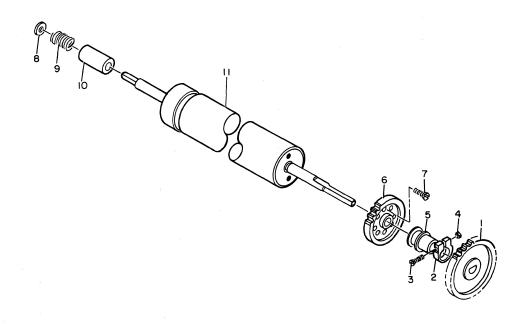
PRINTER FINAL ASSEMBLY. SEE LIST 8.
